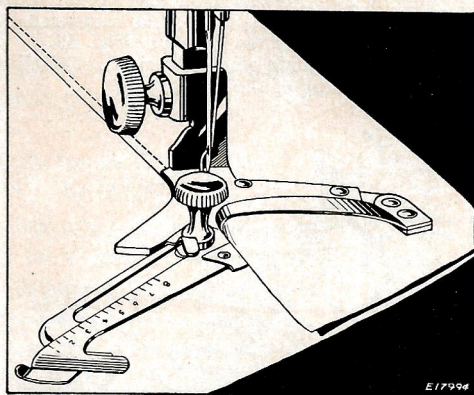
SHOWING HOW ADJUSTABLE HEMMER IS USED FOR MAKING HEMS WIDER THAN 15/16 INCH
